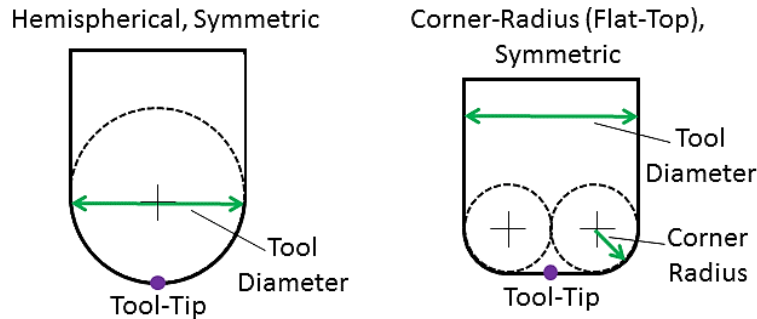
Section views comparing a Hemispherical tool to that of a Corner-Radius (Flat-Top) tool.
